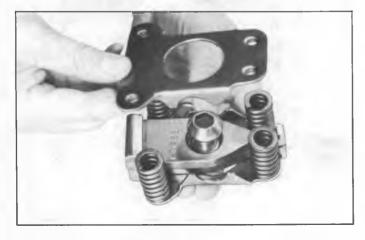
E-Installing Spring Pack Compression Tool (Corvette)
